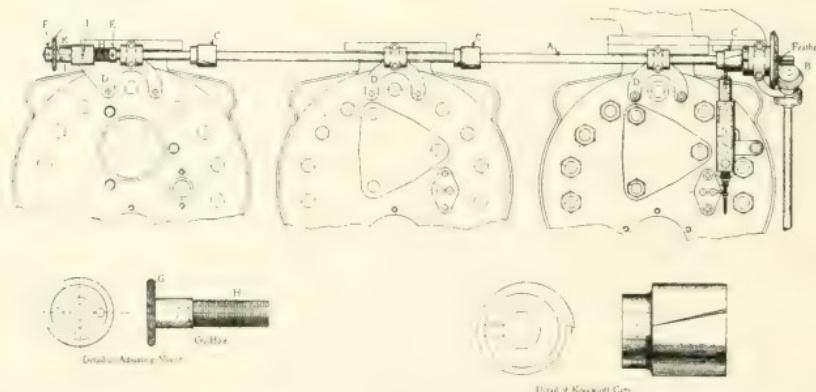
FIG. I.—ASSEMBLY PLAN OF IGNITER CAM SHAFT WITH IGNITION CHANGING DEVICE
